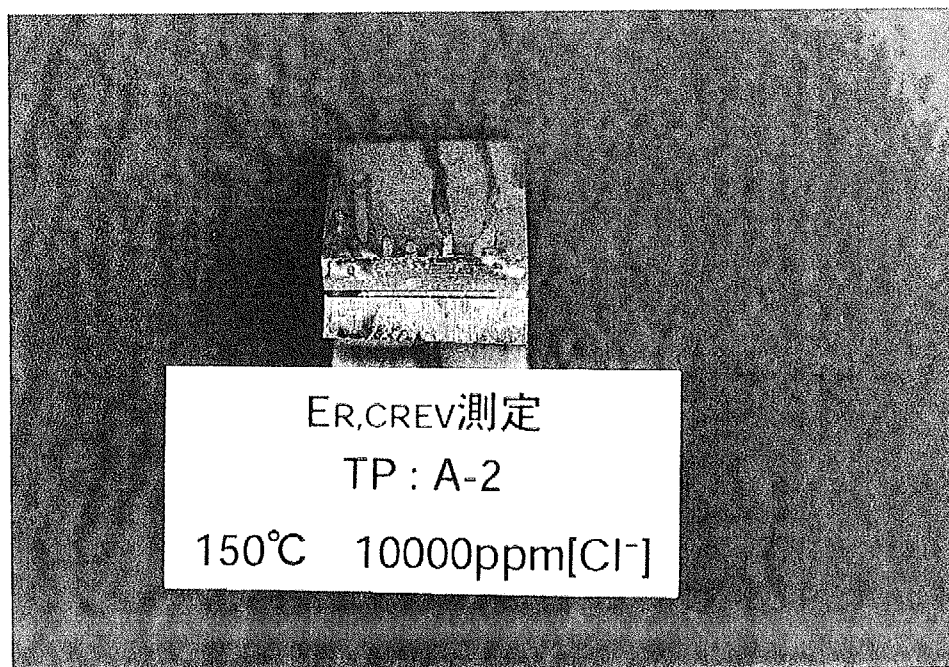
Photo of crevice opening surface and internal surfaces of the crevice with cutting the test piece, about welded crevice test piece A-2 after test
